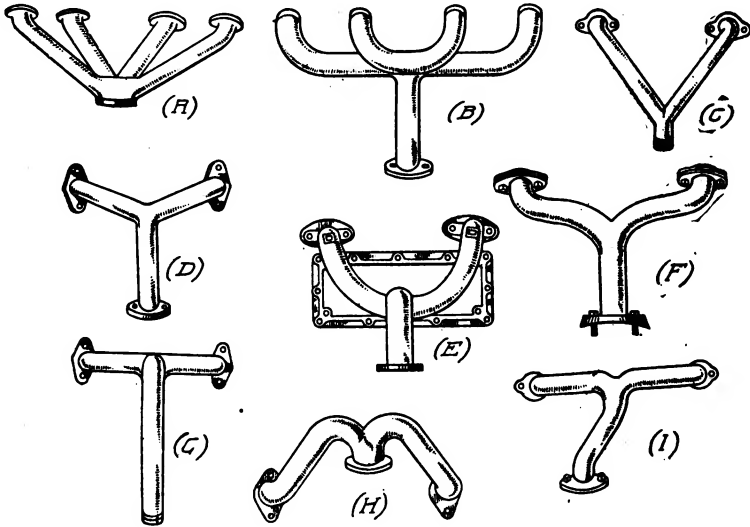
Different Types of Inlet Manifolds for Four-Cylinder Engines
